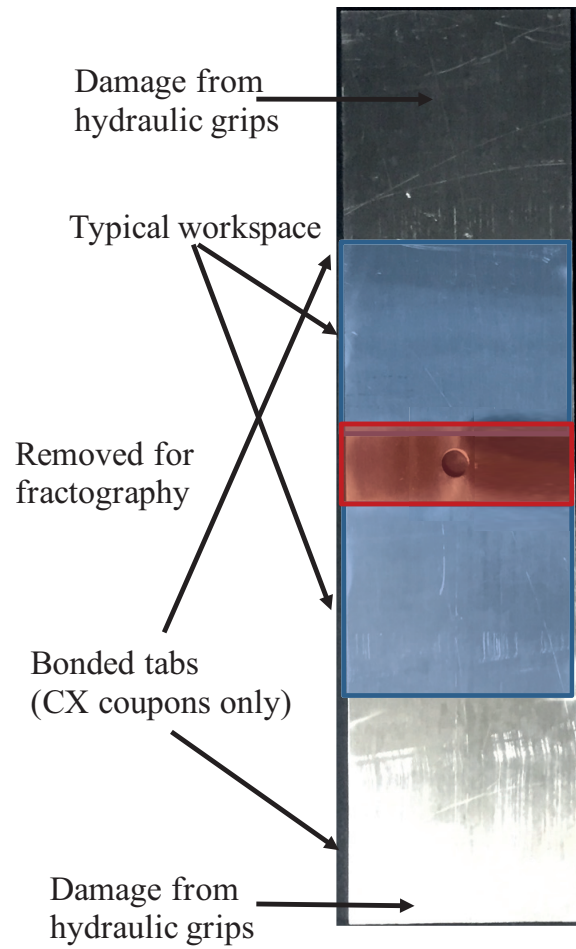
Image of Non-Cold Expanded (Non-Cxed) Fatigue Coupon Showing Locations where Residual Stress Coupons Were Extracted.
